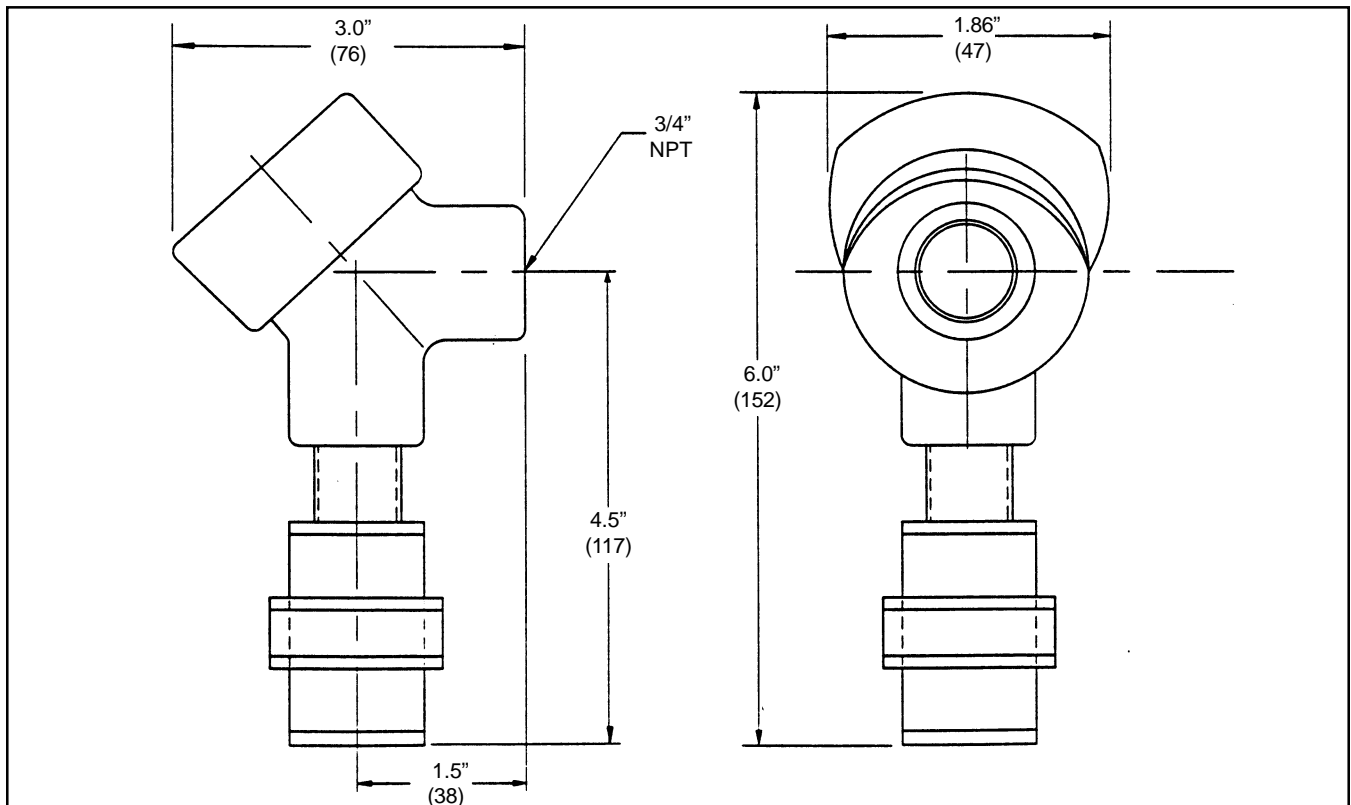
FC420 Mounted in Y3 Enclosure Dimensions
